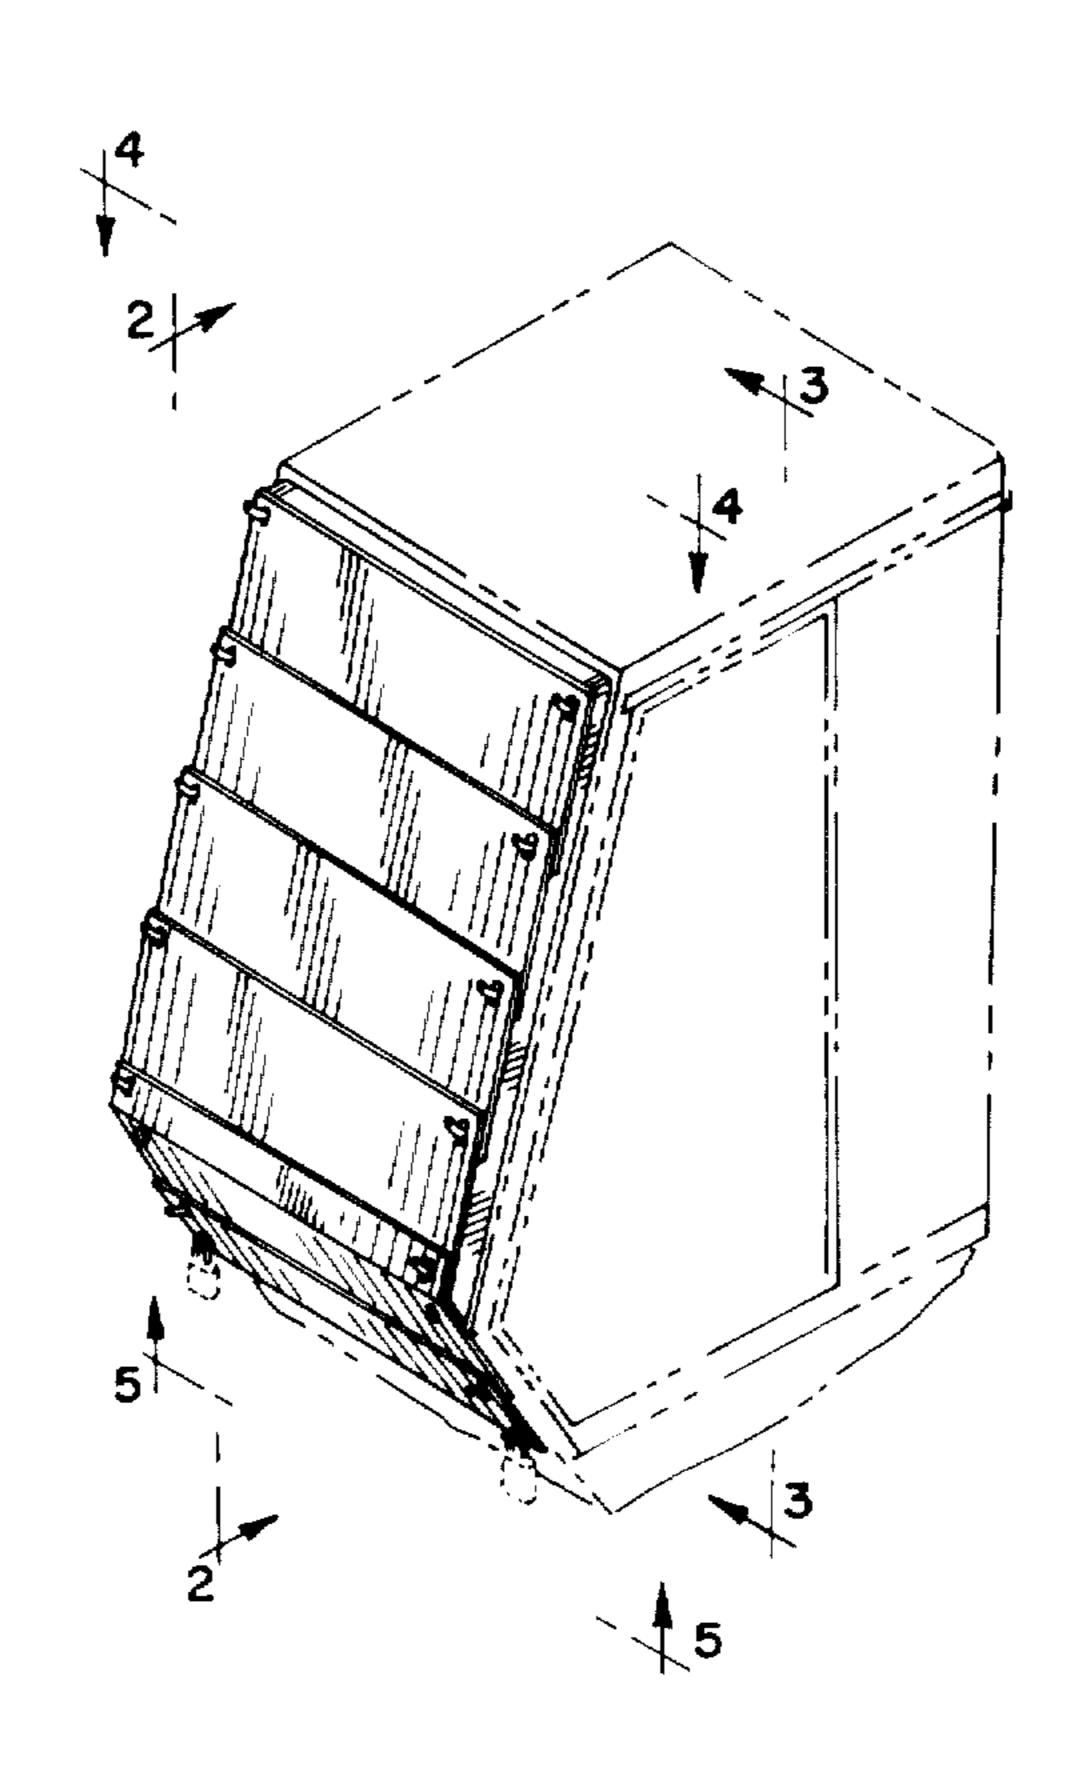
is a top, left side isometric view of a sectionalized panel and cowl for covering a windshield showing our new design;
